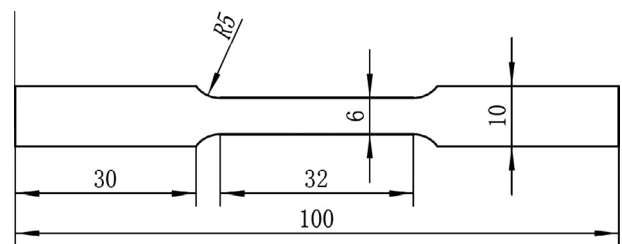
Shape and dimensions of the tensile specimens from the weld (unit: mm).
